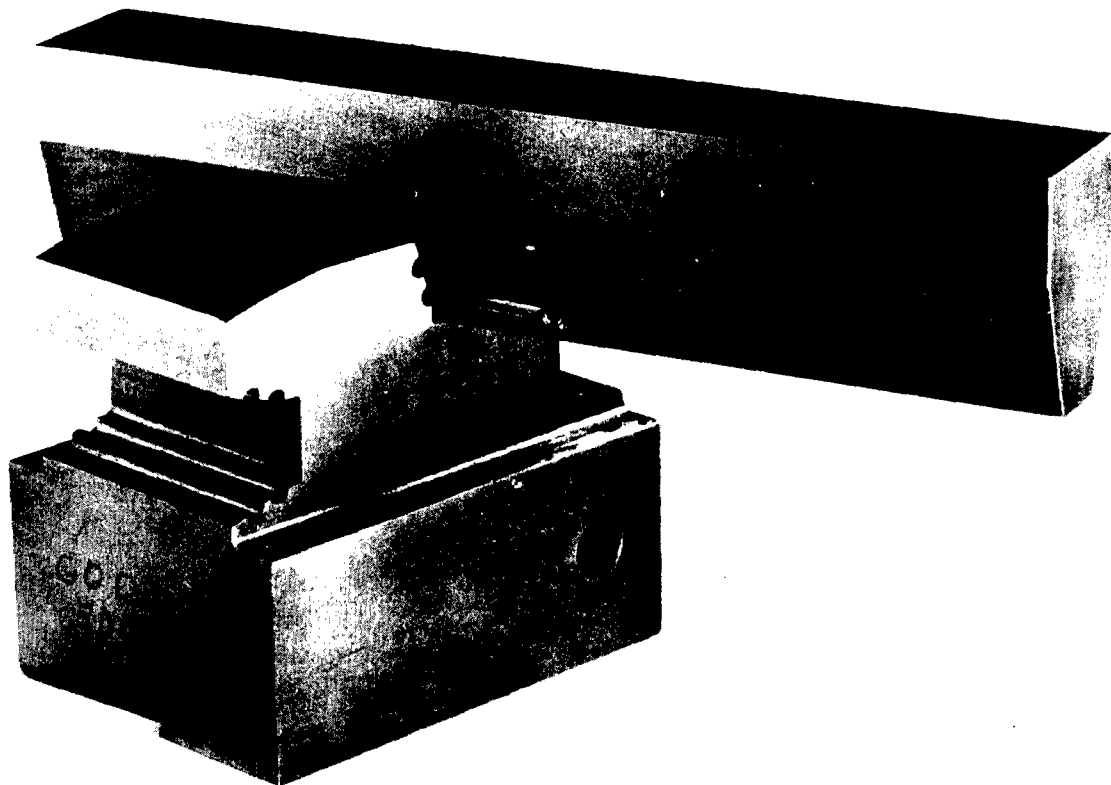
Rotor Pinhole Blade Attachment Sample, Fluid-Cooled Turbine.
